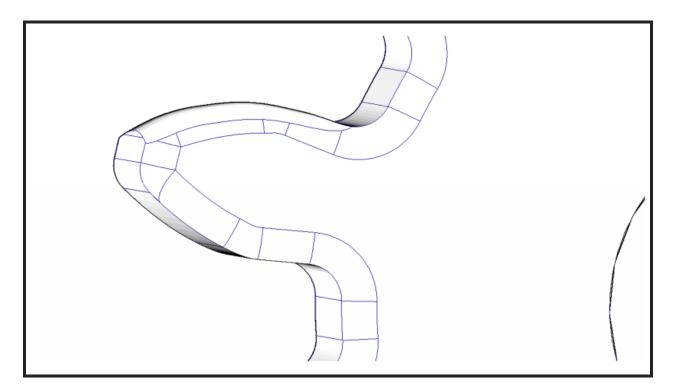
Tooth Crown for the Toleranced Gear. The drive side, above, of the top gear is crowned. The Nominal Gear is not crowned.
